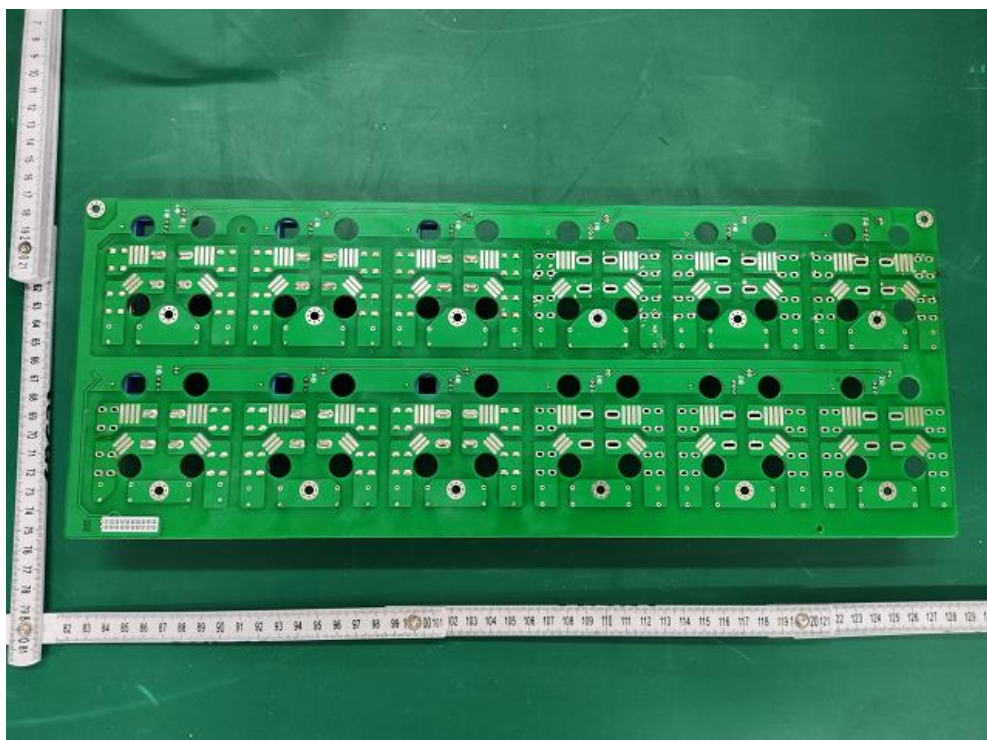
Back view of PV input board for C6-50K-T6-LV-40
